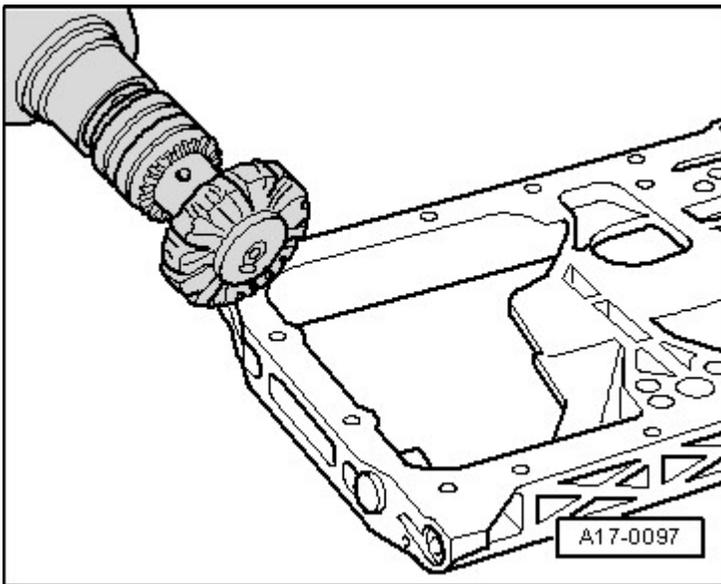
Identifying Rotating Plastic Brush, Removing Any Remaining Sealant From Cylinder Head And Guide Frame
